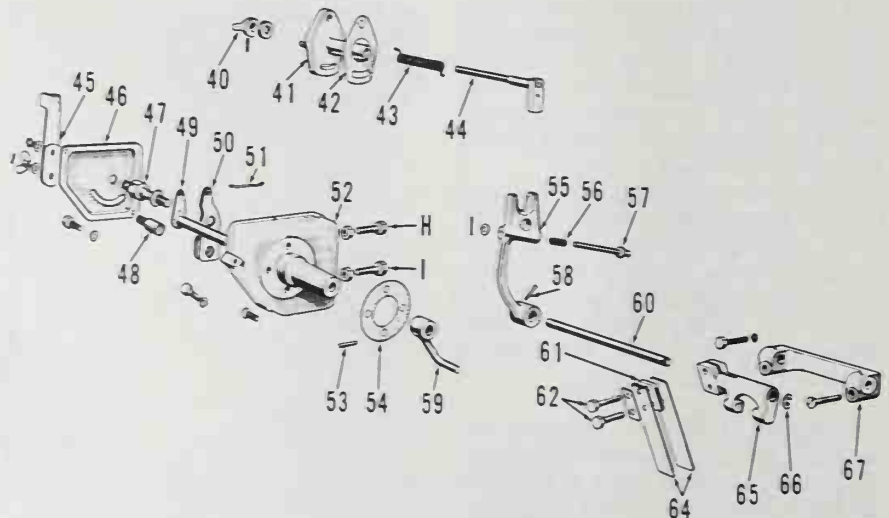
Exploded view of governor and control linkage. Governor fork (65) contacts governor cup (31 — Fig. L5-7).
